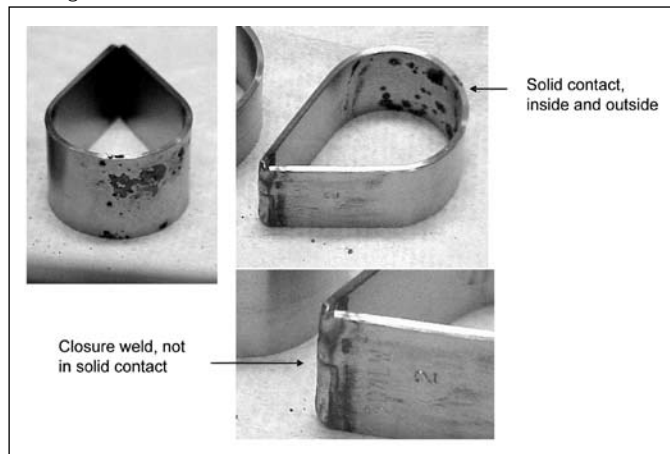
Container 4b-1 teardrop coupon 304L – 02 showing pitting inside and outside in metal in solid contact; no evidence of cracking; staining near closure weld
